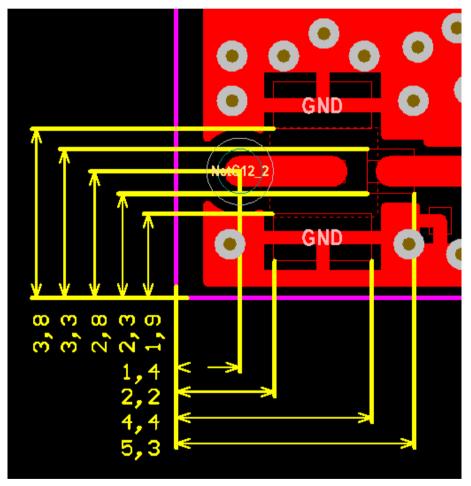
Coaxial connector and wire antenna footprint (all pads in draft view mode)
